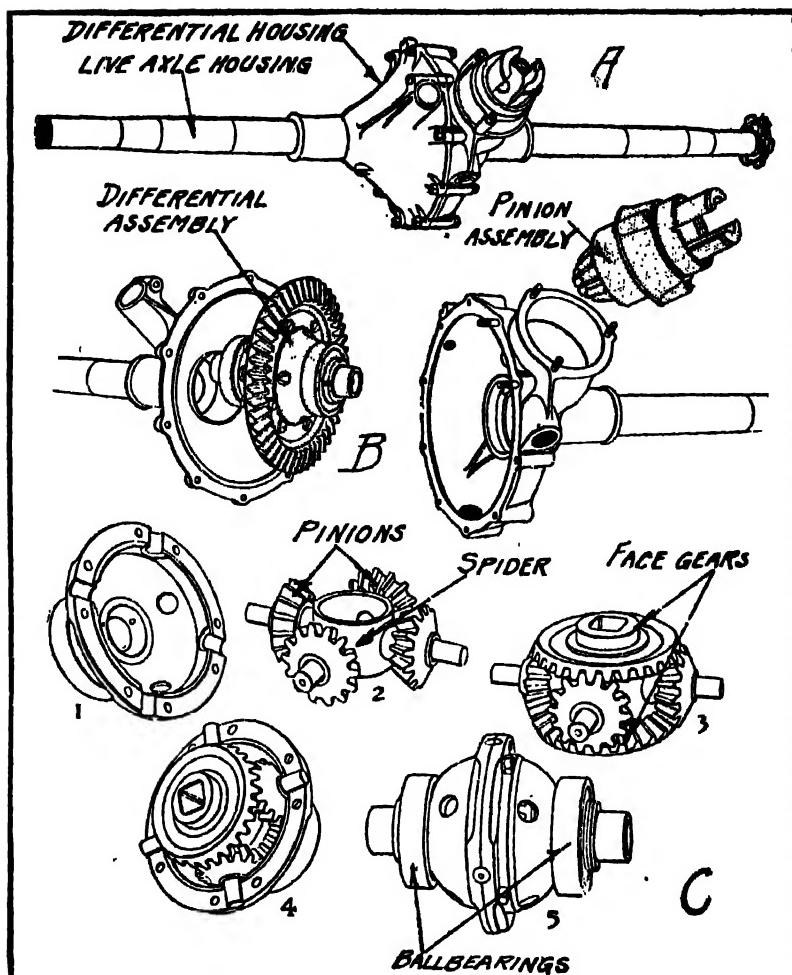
Defining Construction of Bevel Pinion Differential Gearing.
